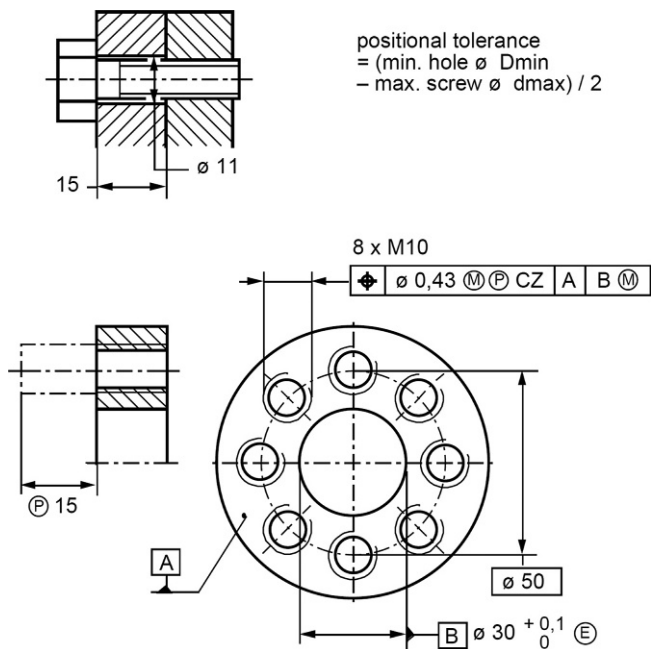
Threaded holes for fixed fasteners (head screws)
